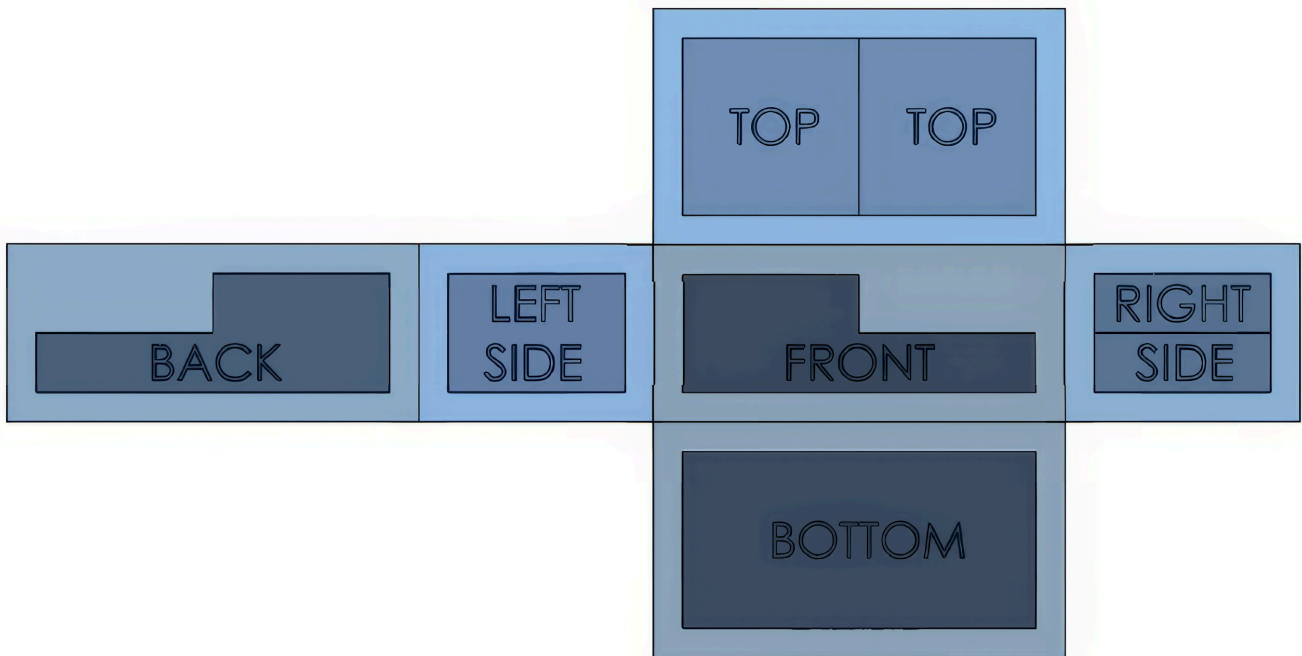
Six principal view placement of Figure 2-15 as they would appear on a part drawing.
